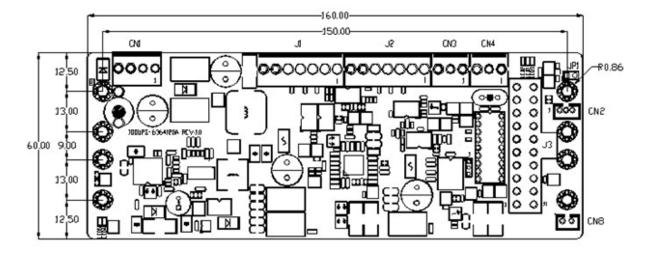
IDDUPS-6364120/636260 Dimensions (mm)
